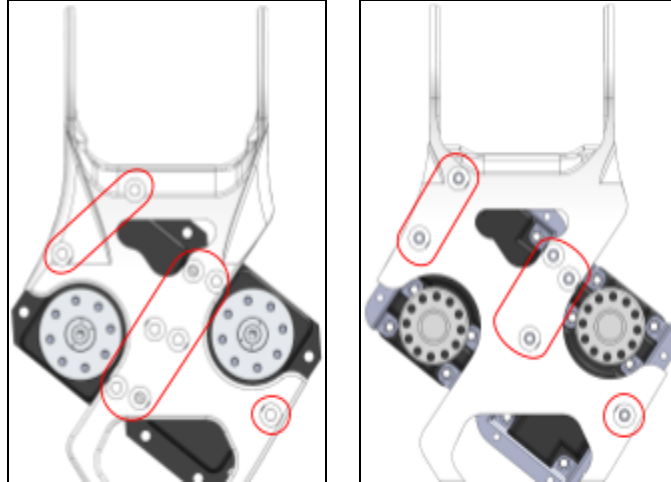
Original pelvis assembly (left) and modified pelvis assembly (right)
